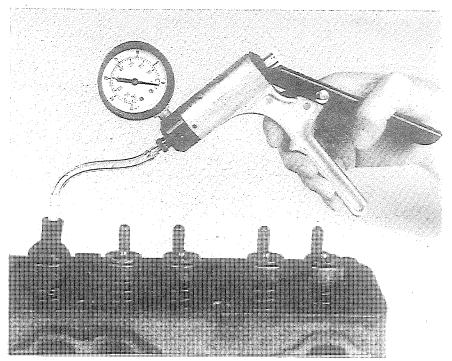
When testing valve stem seals, always lube the adapter with a film of motor oil to prevent air leaks between the valve spring retainer and the umbrella adapter.
